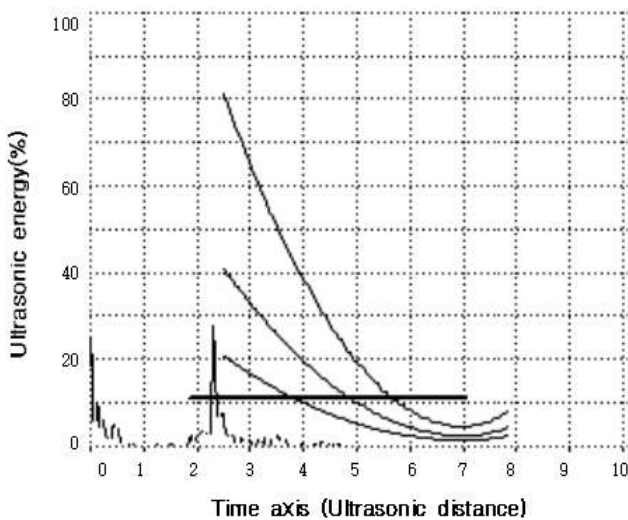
Ultrasonics signal of titanium welding zone (A-①)
